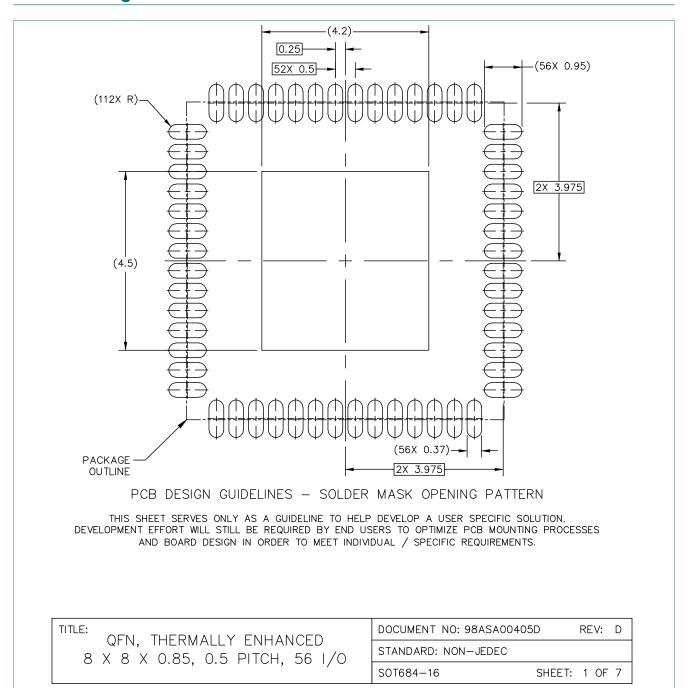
Reflow soldering footprint part1 for HVQFN56 (SOT684-16)
